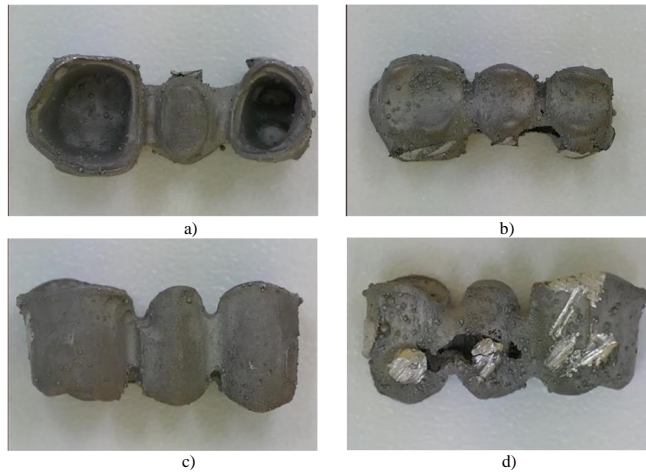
Macroscopic image of the experimental sample obtained by classical casting: a) upper vision; b) lower view; c), d) side view
